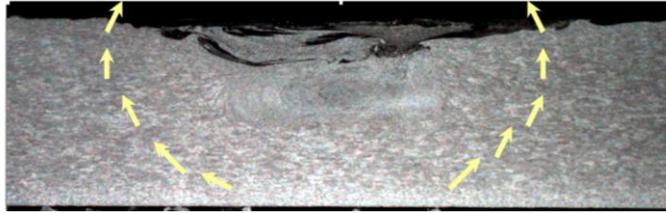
Picture of a Microstructure of a weld depicting bend test forces
